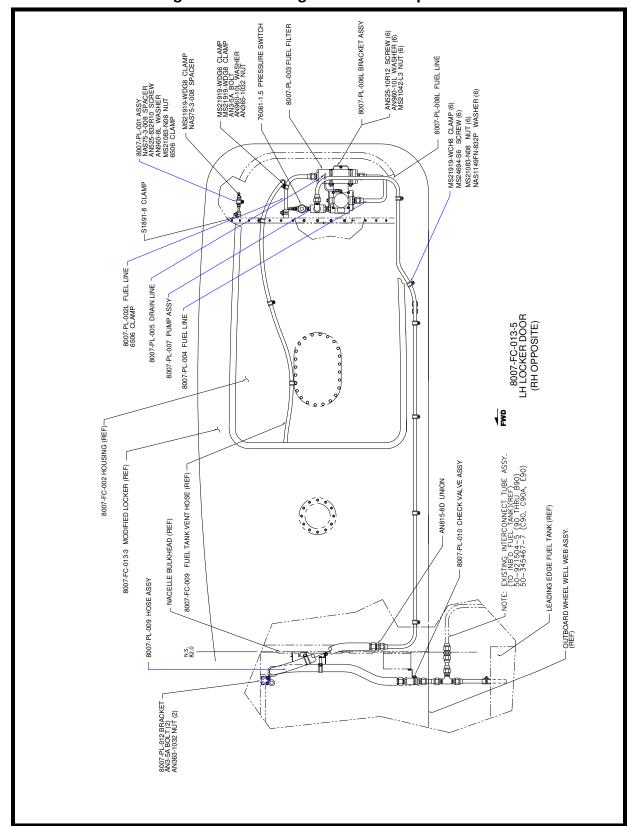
Containment Housing Assembly Installation (Bottom View)
